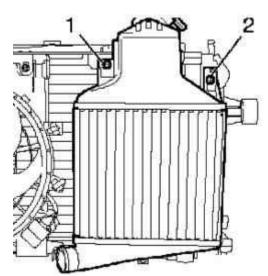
Mounting the cooler air pressurization: 1 - attachment bolt, 2 - nuts
